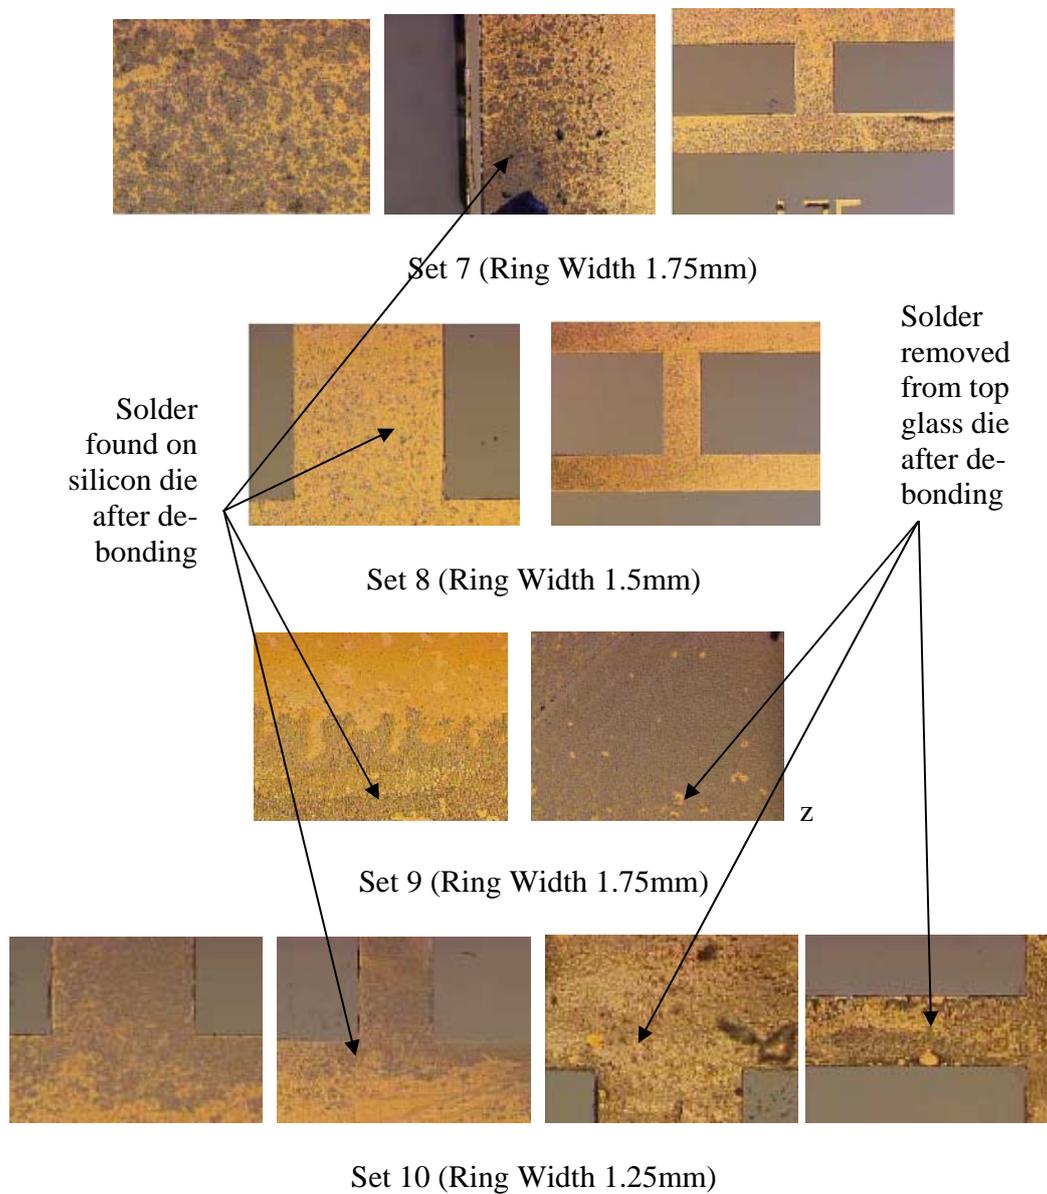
Solder wetted gold metallization on the bottom chip (set 7 – set 10)
